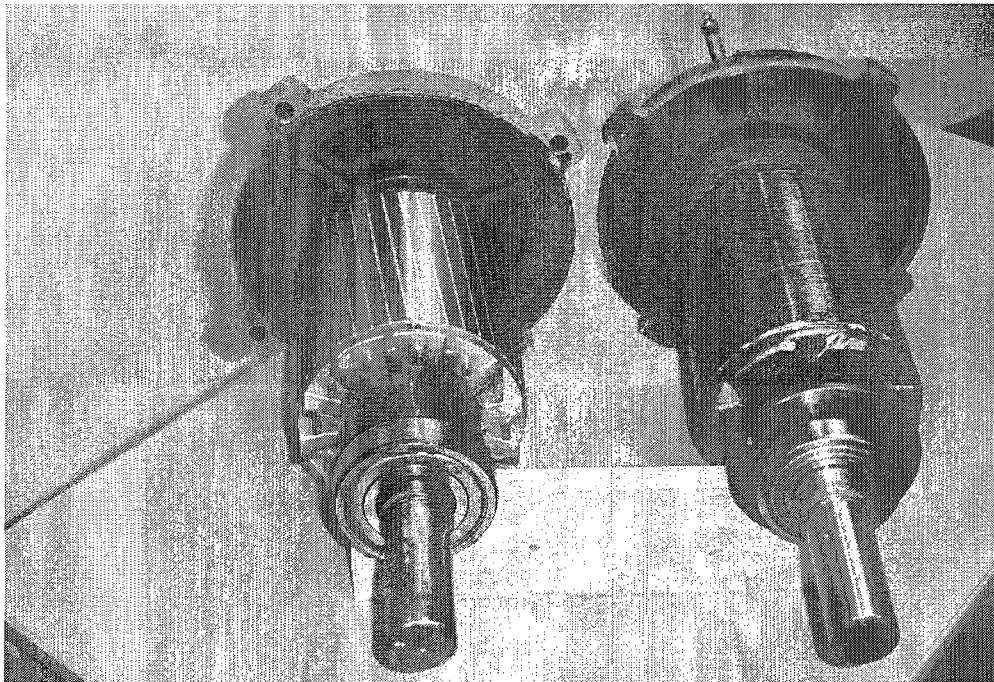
Rotors of Al-and Cu-rotor Induction Machine.
